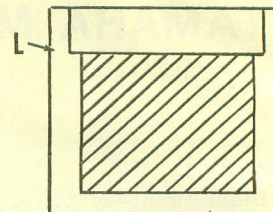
Hydraulic fluid level (L) in reservoir should be maintained at first step in reservoir body.
